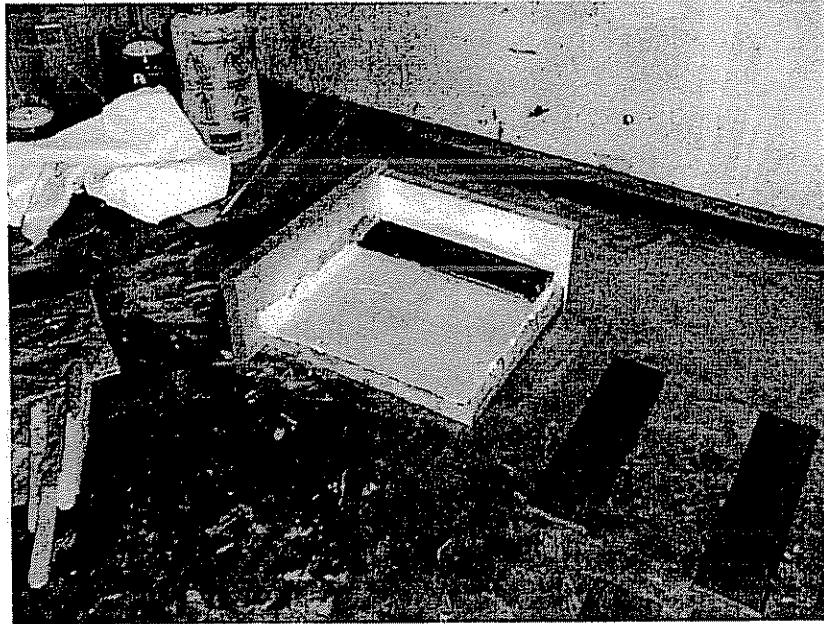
Composite strip placed on scrim and aligned with edge of jig.
